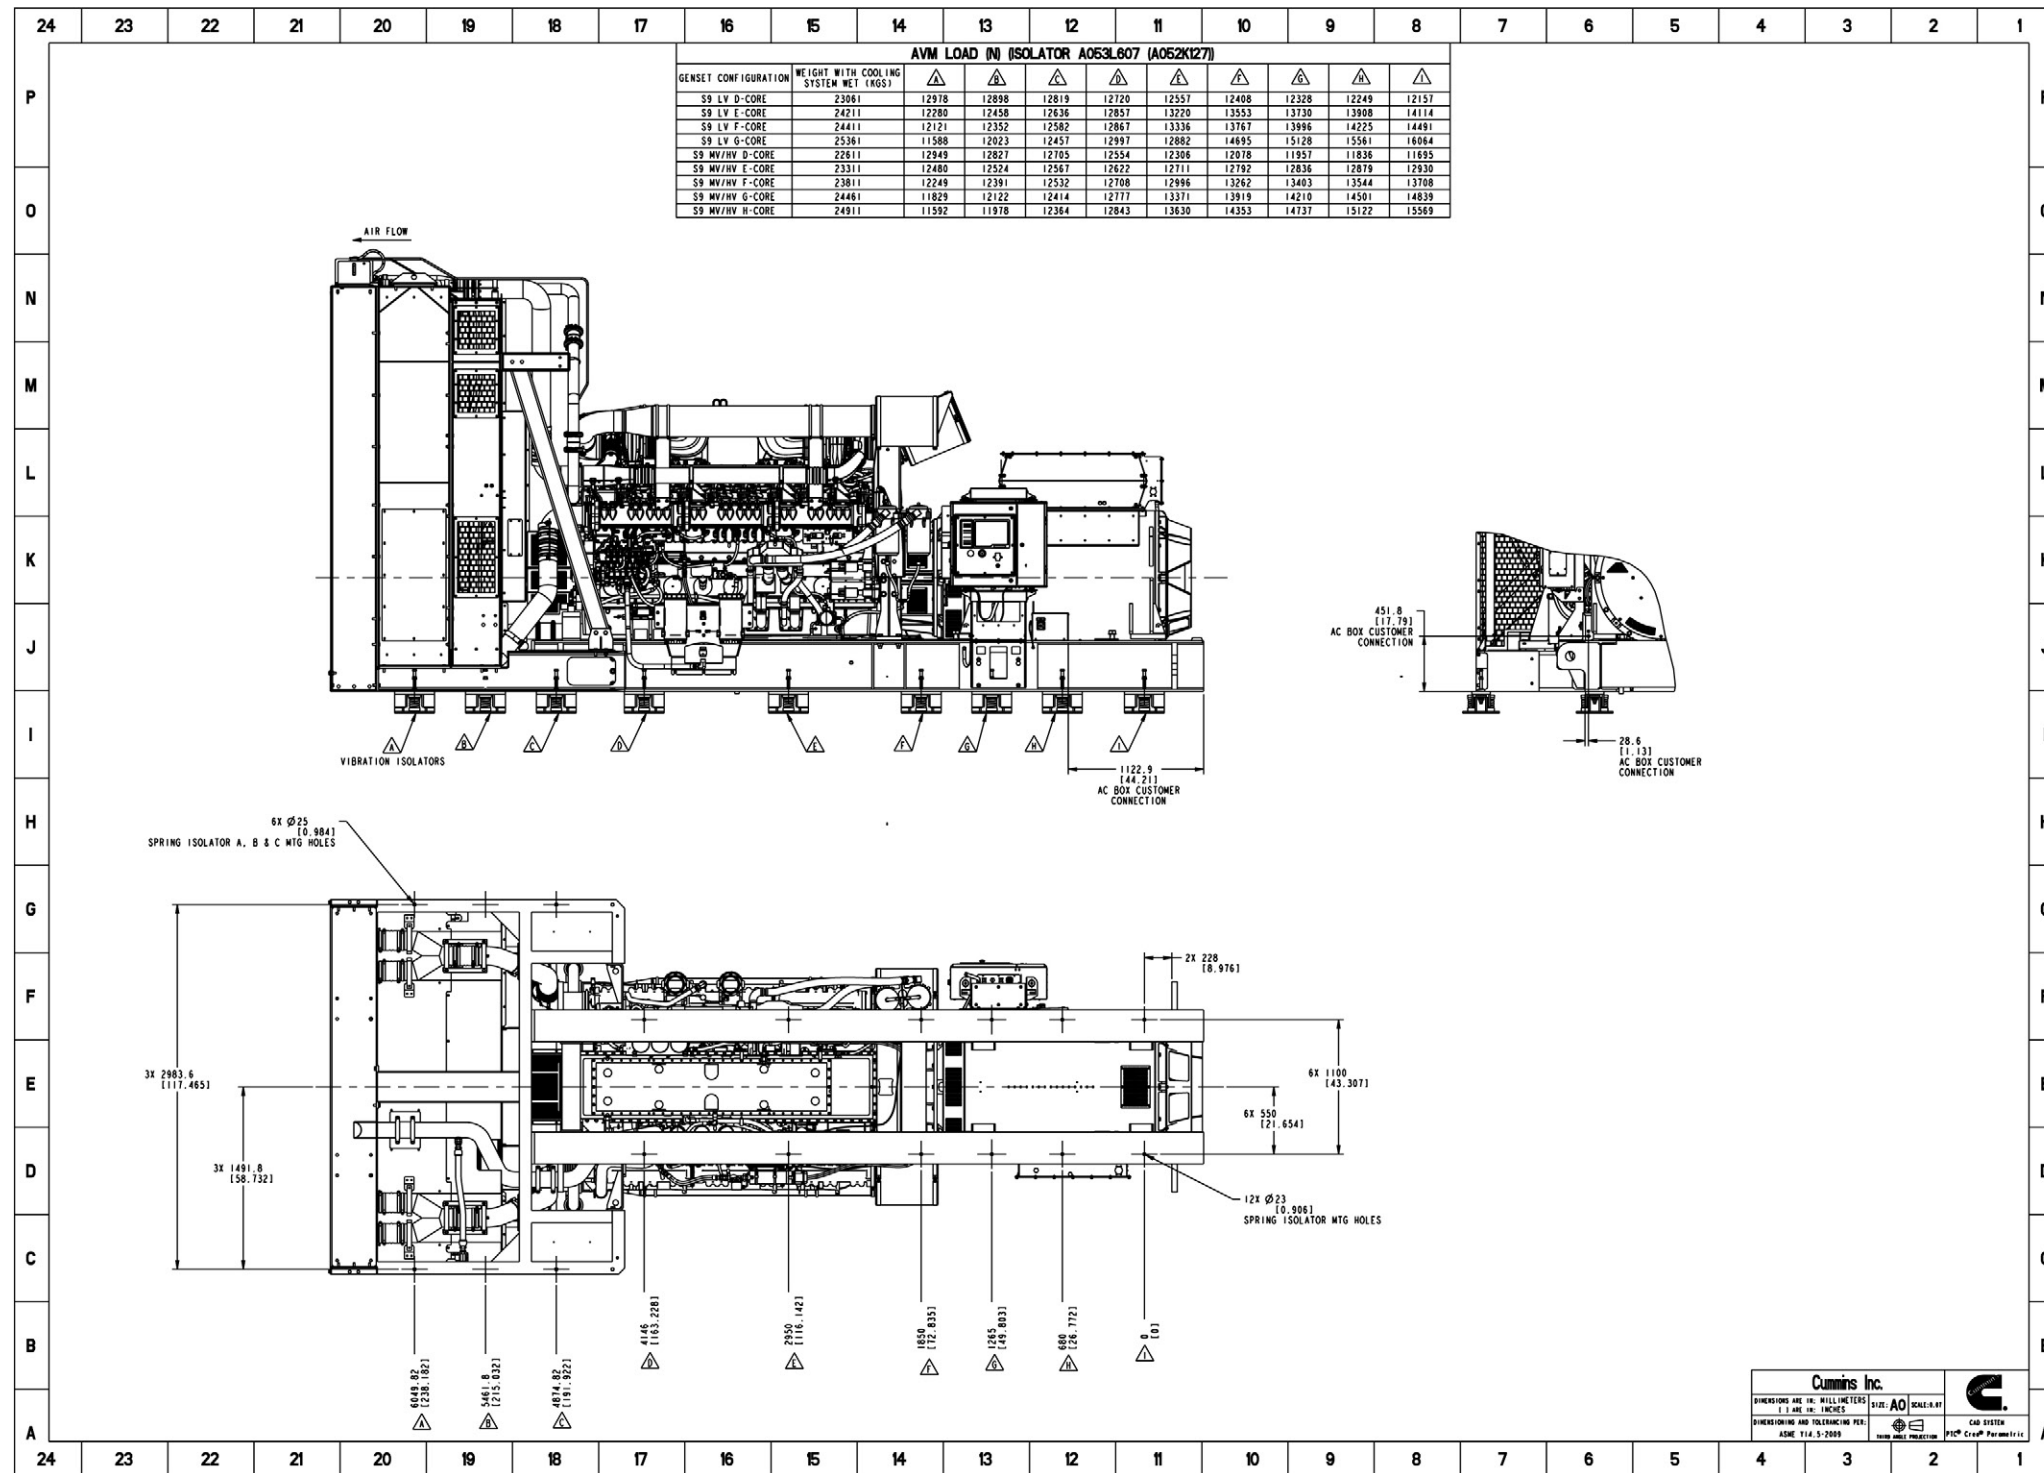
OUTLINE DRAWING (SHEET 5 OF 8)
